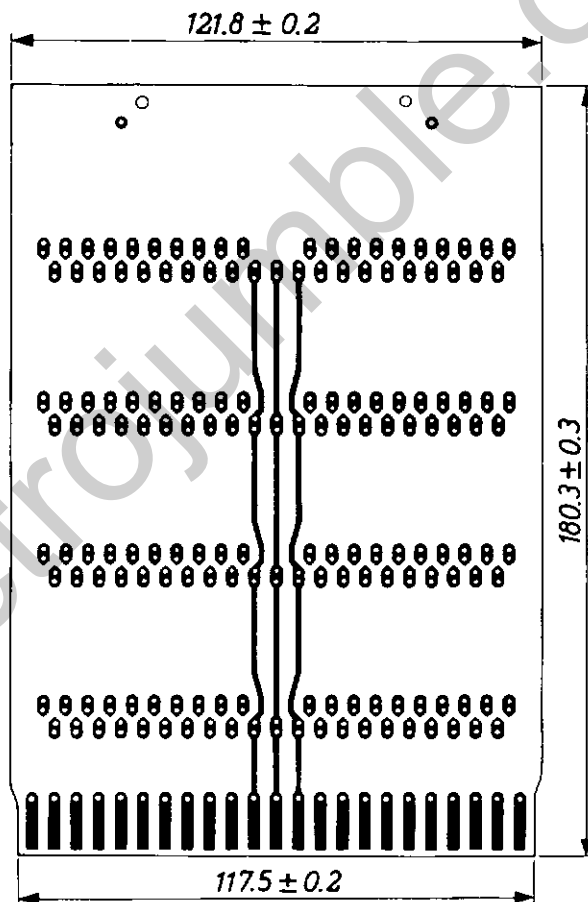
Universal Printed-Wiring Board Type P8 906 15
